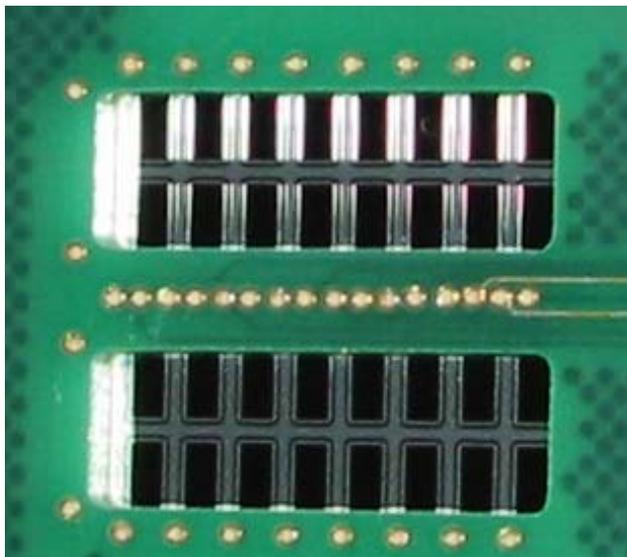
Prototype NOvA APD mounted on carrier board.
